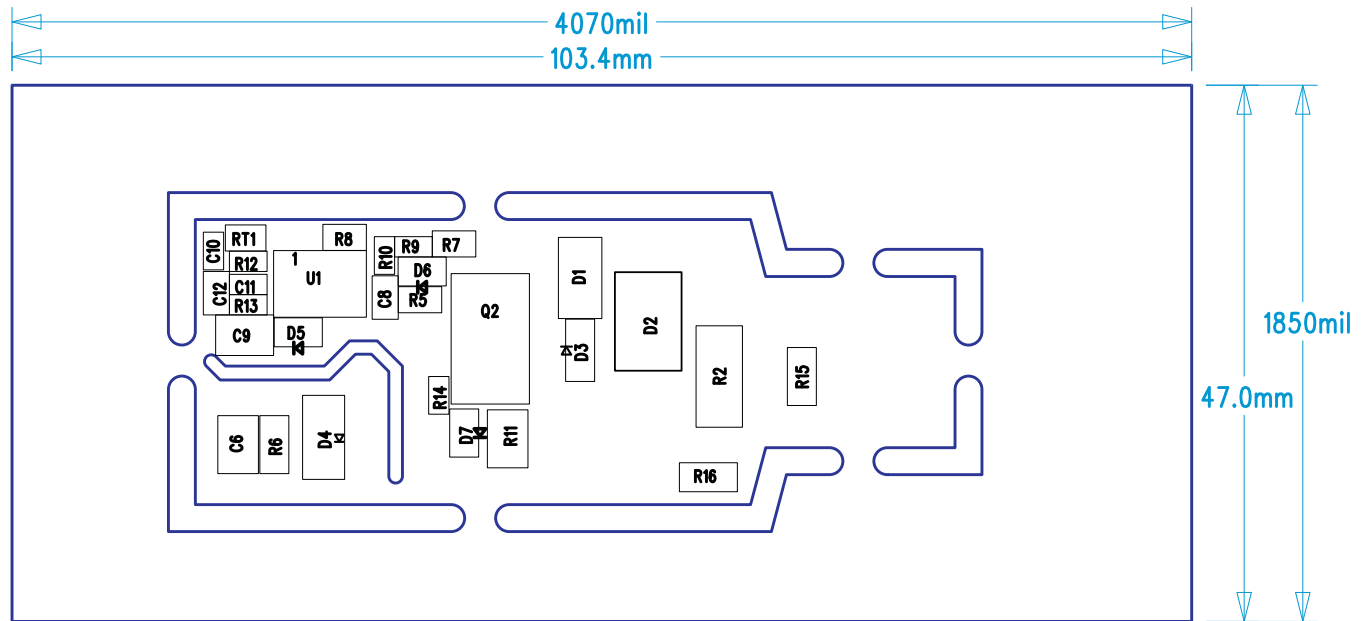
LM3447-A19-120VEVM Bottom Assembly Drawing (bottom view)
